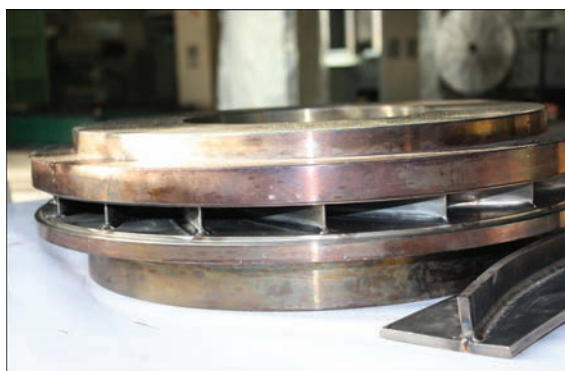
General view of main and covering discs of impeller before assembly and welding
